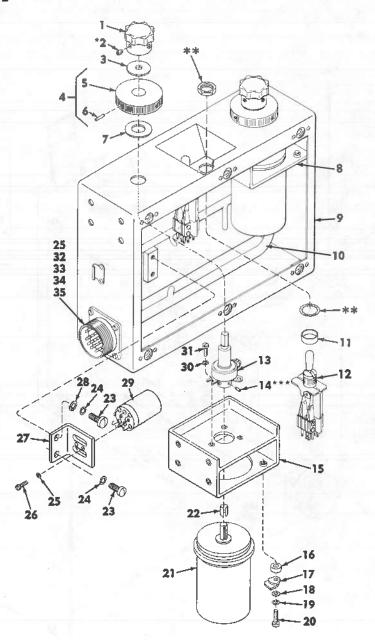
FRAME, FILTER /9000044/-EXPLODED VIEW /SEE FIGURE 8 FOR NEXT HIGHER ASSEMBLY/
